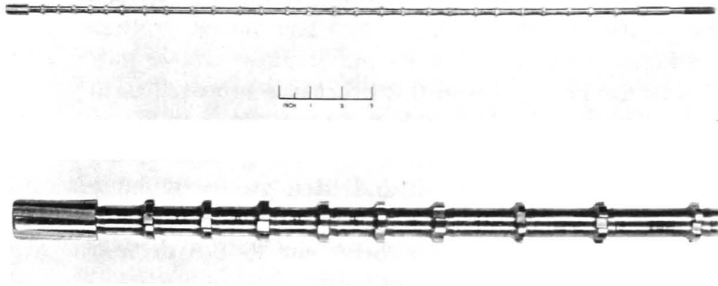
Broach for cutting rifling. Upper view shows the entire tool, about 23" in length, with 27 cutters. The lower view shows a section enlarged.
